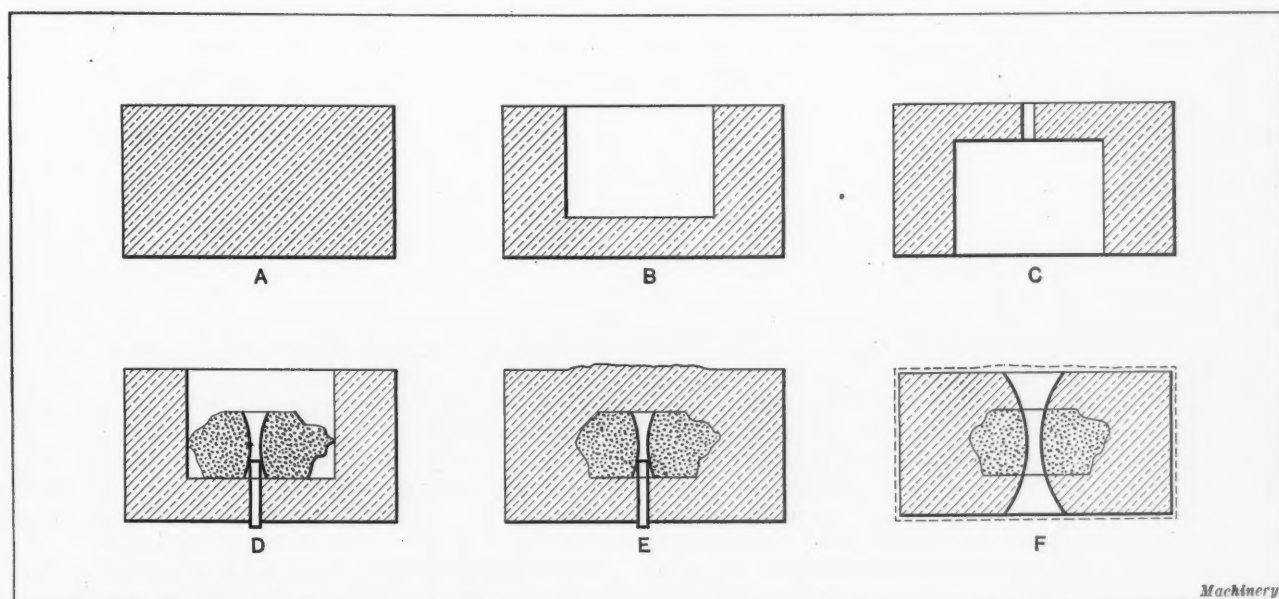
Cross-sectional Views showing Successive Steps in making the Mount and mounting a Diamond Wire-drawing Die
